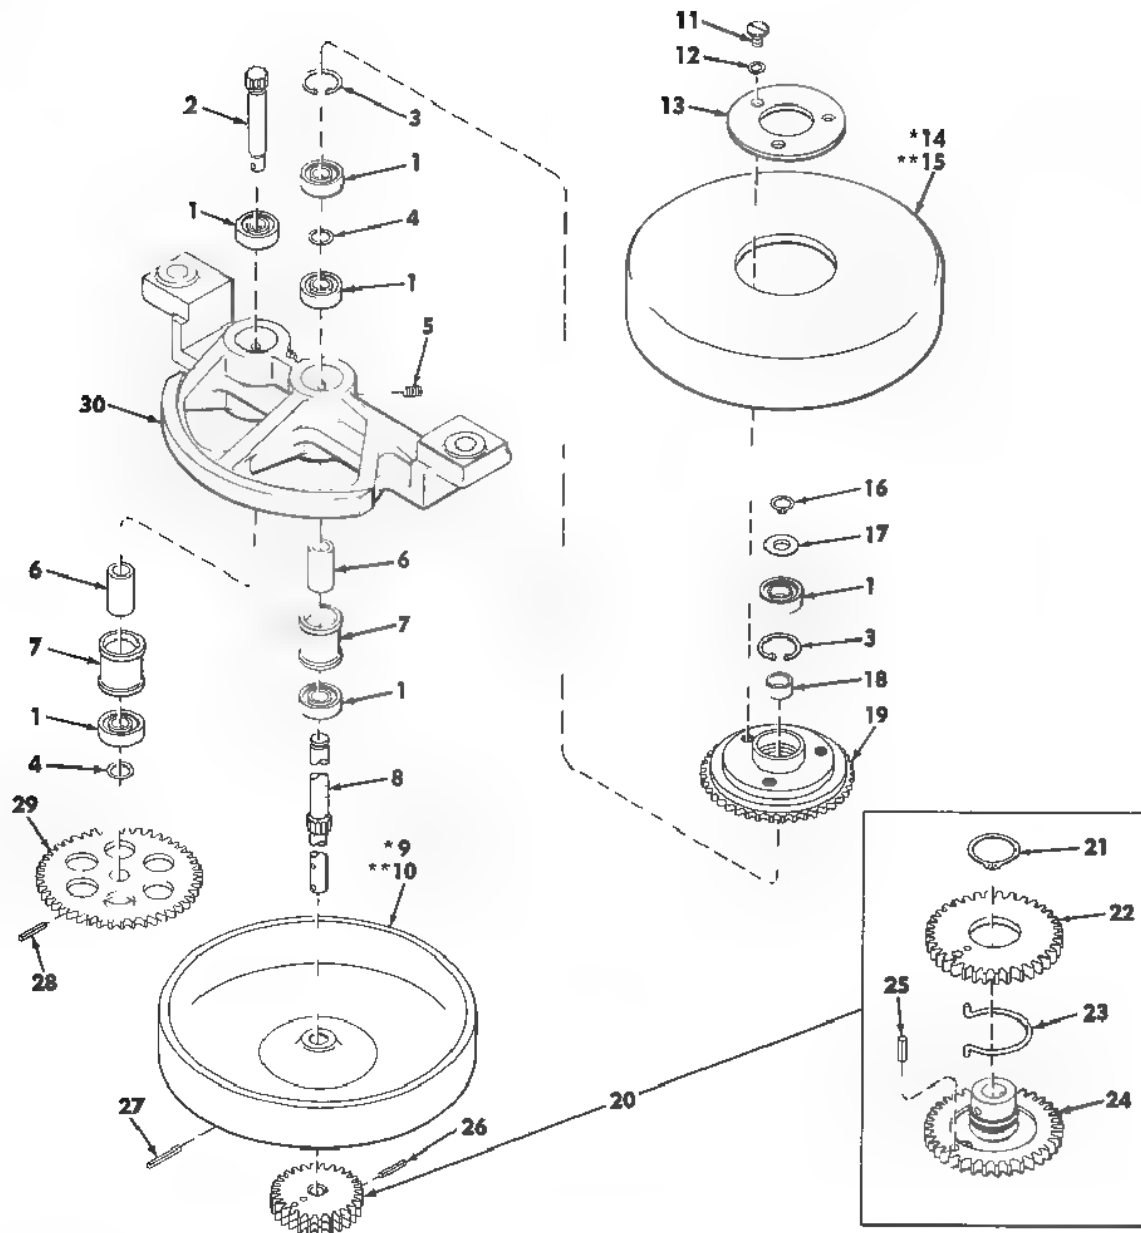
BEARING ASSEMBLY /8171778/-EXPLODED VIEW
